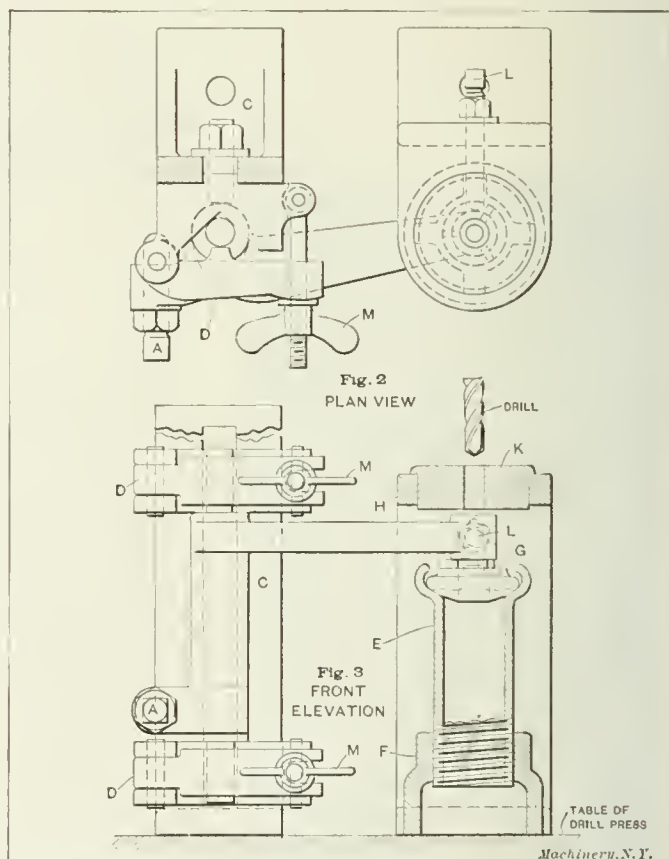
Plan View of Fixture used in Drilling the Lever shown in Fig. 1. Fig. 3. Front Elevation of Drilling Fixture showing Method of Supporting the Levers
